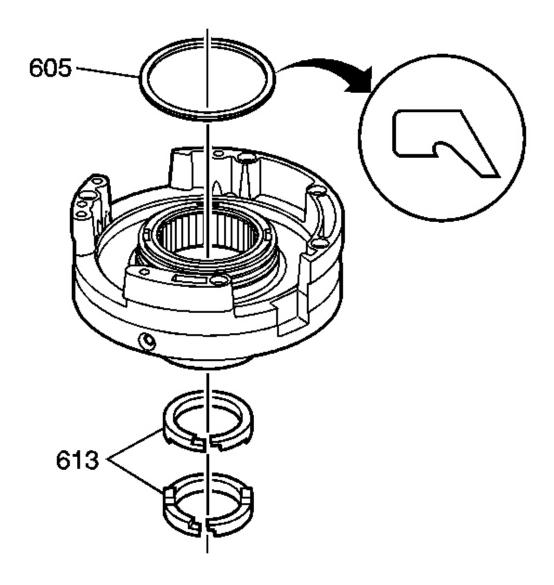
Removing Inner Seal & Oil Seal Rings From Driven Sprocket Support Courtesy of GENERAL MOTORS CORP.
